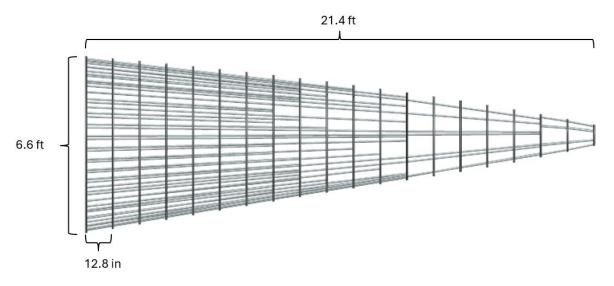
DIMENSIONED VIEW OF FUSELAGE SUBSTRUCTURE
